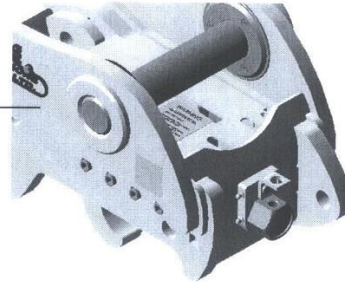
Shows the adjuster bolt locked tight and the locking mechanism engaged.
